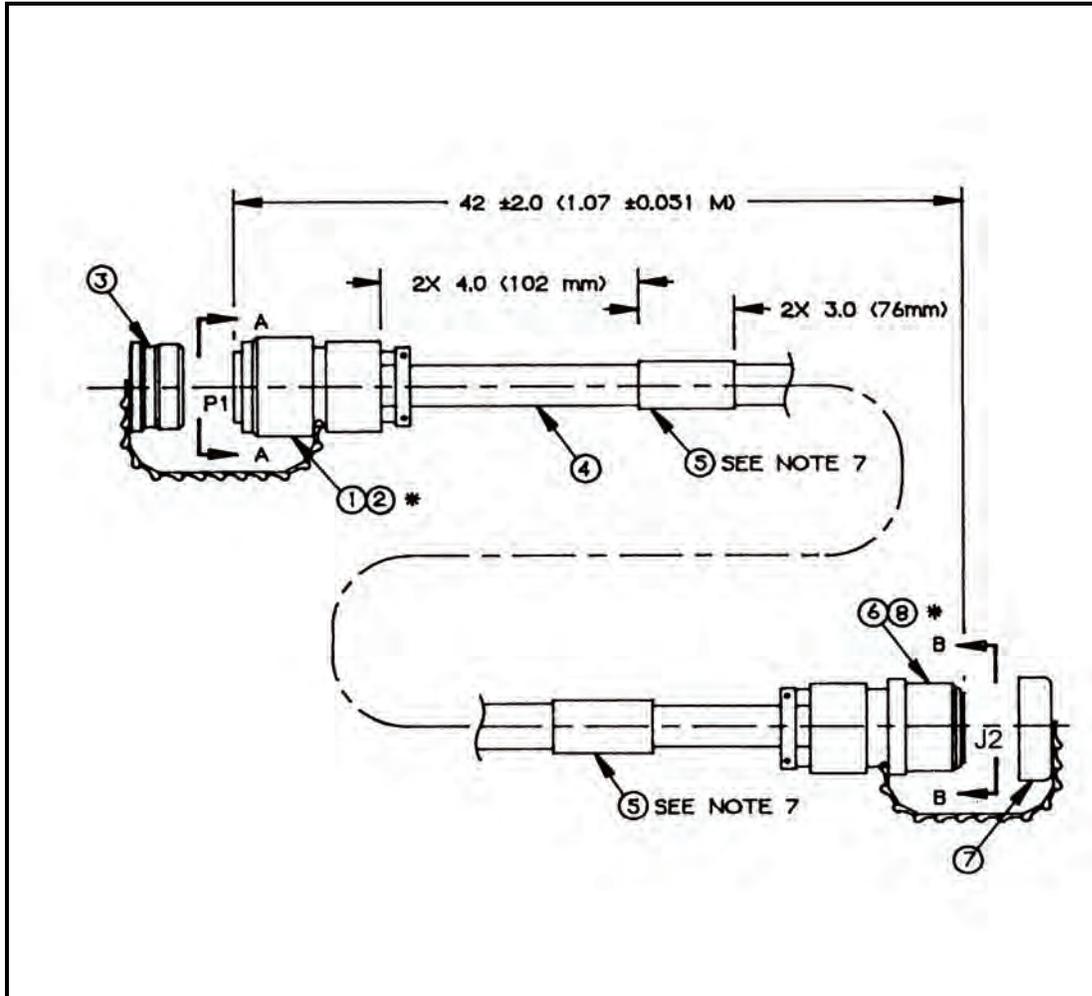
Extension Cable Assembly, 20-Amp, (3.5 ft) (1 of 2)
